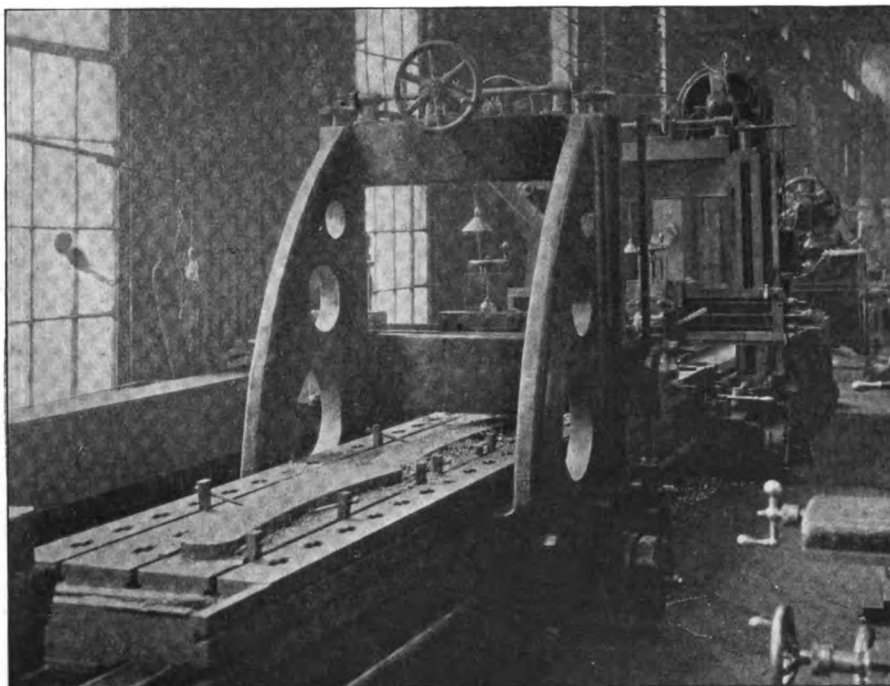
UNIQUE TYPE OF PLANER EQUIPPED WITH TWO HOUSINGS—THE PIECES SHOWN ON THE PLATEN ARE LINK BARS
